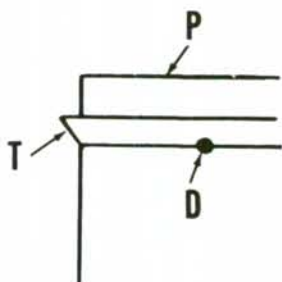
Tapered piston rings on some models must be installed so taper (T) is toward top of piston (P). Locating dot (D) on ring will be toward bottom when installed correctly.
